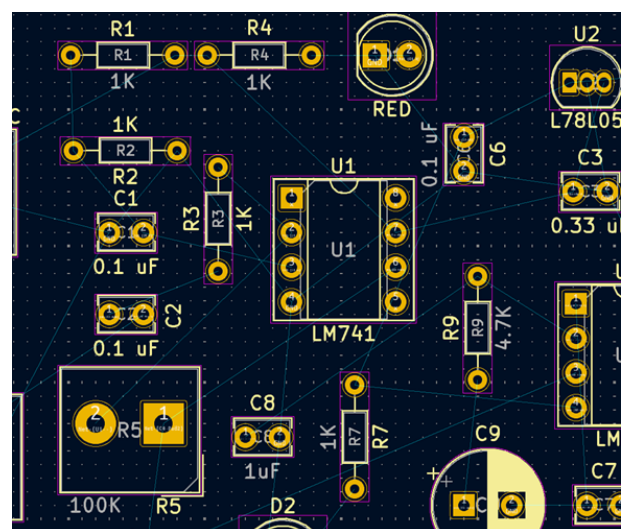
Unrouted PCB Showing Components and Ratsnest Wires in Blue
